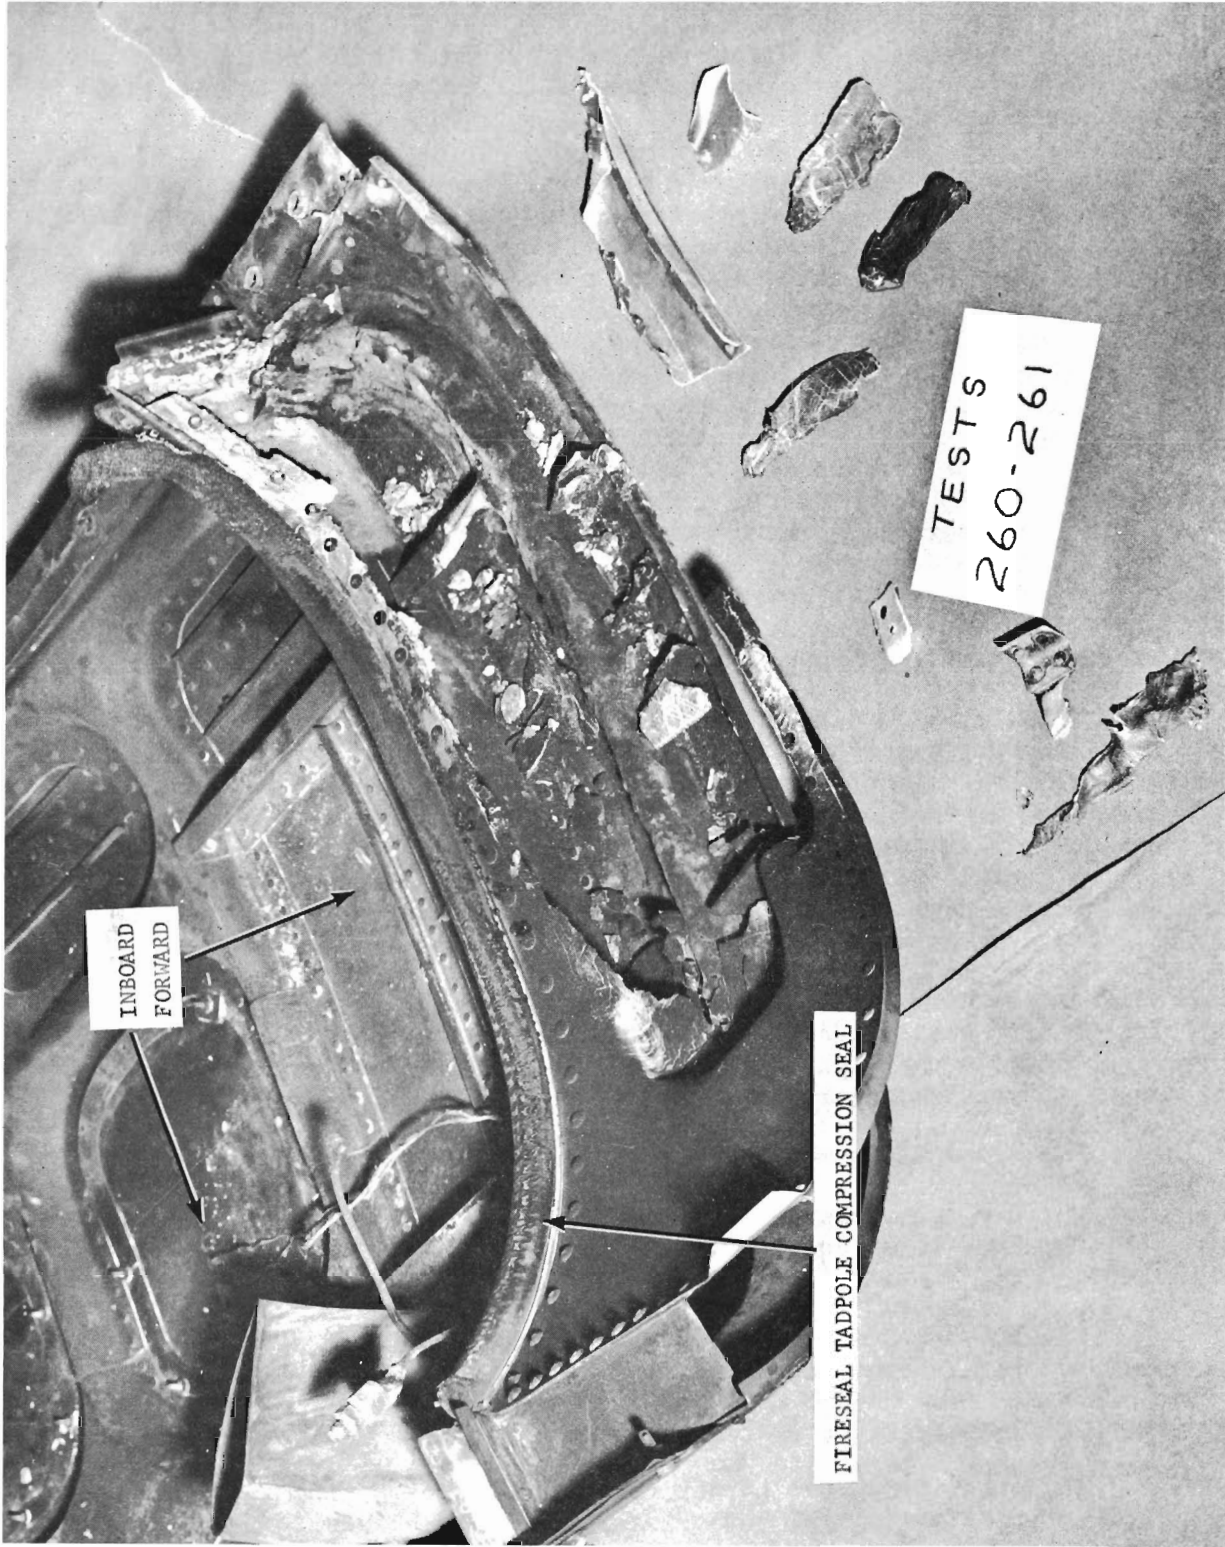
DAMAGE TO FIRE SEAL TADPOLE COMPRESSION SEAL AND ZONE I ACCESS DOOR BAFFLE SECTION
